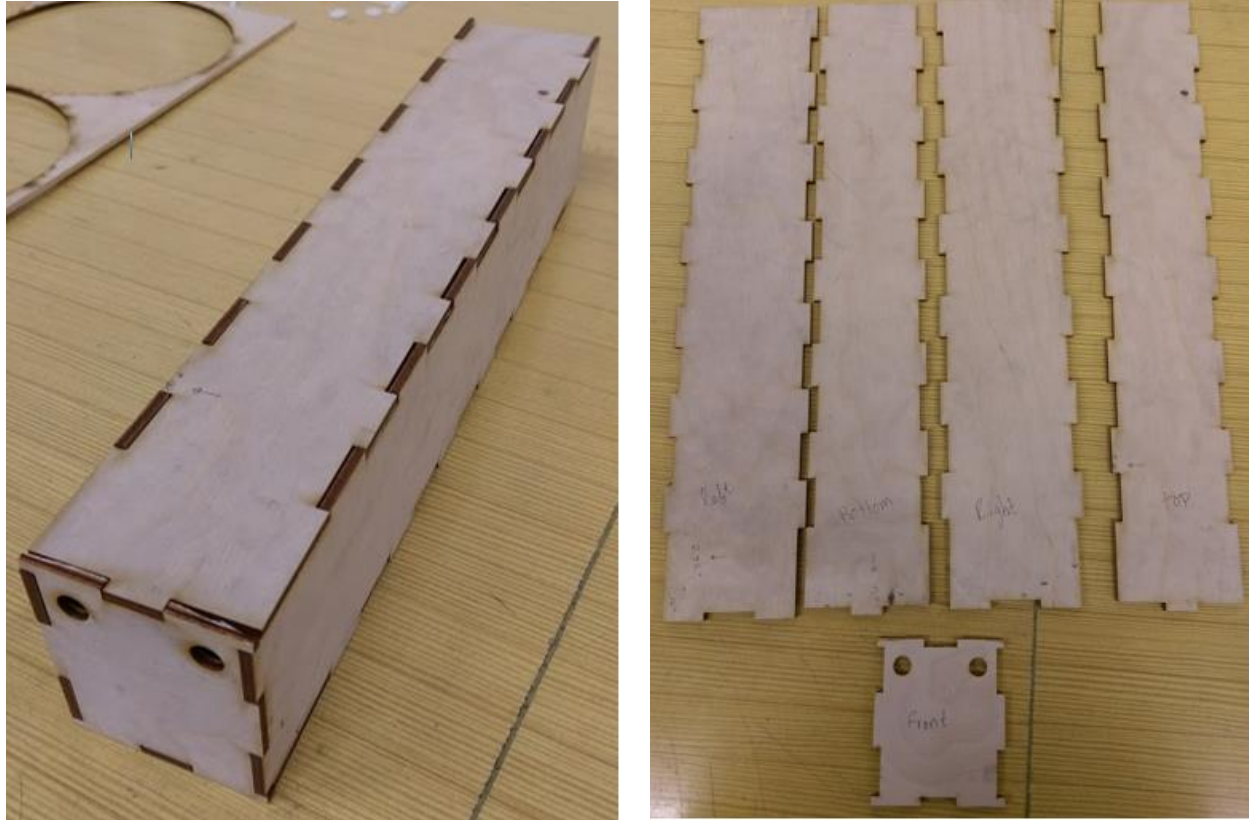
The 48-foot trailer model before and after assembly of the five panels.
